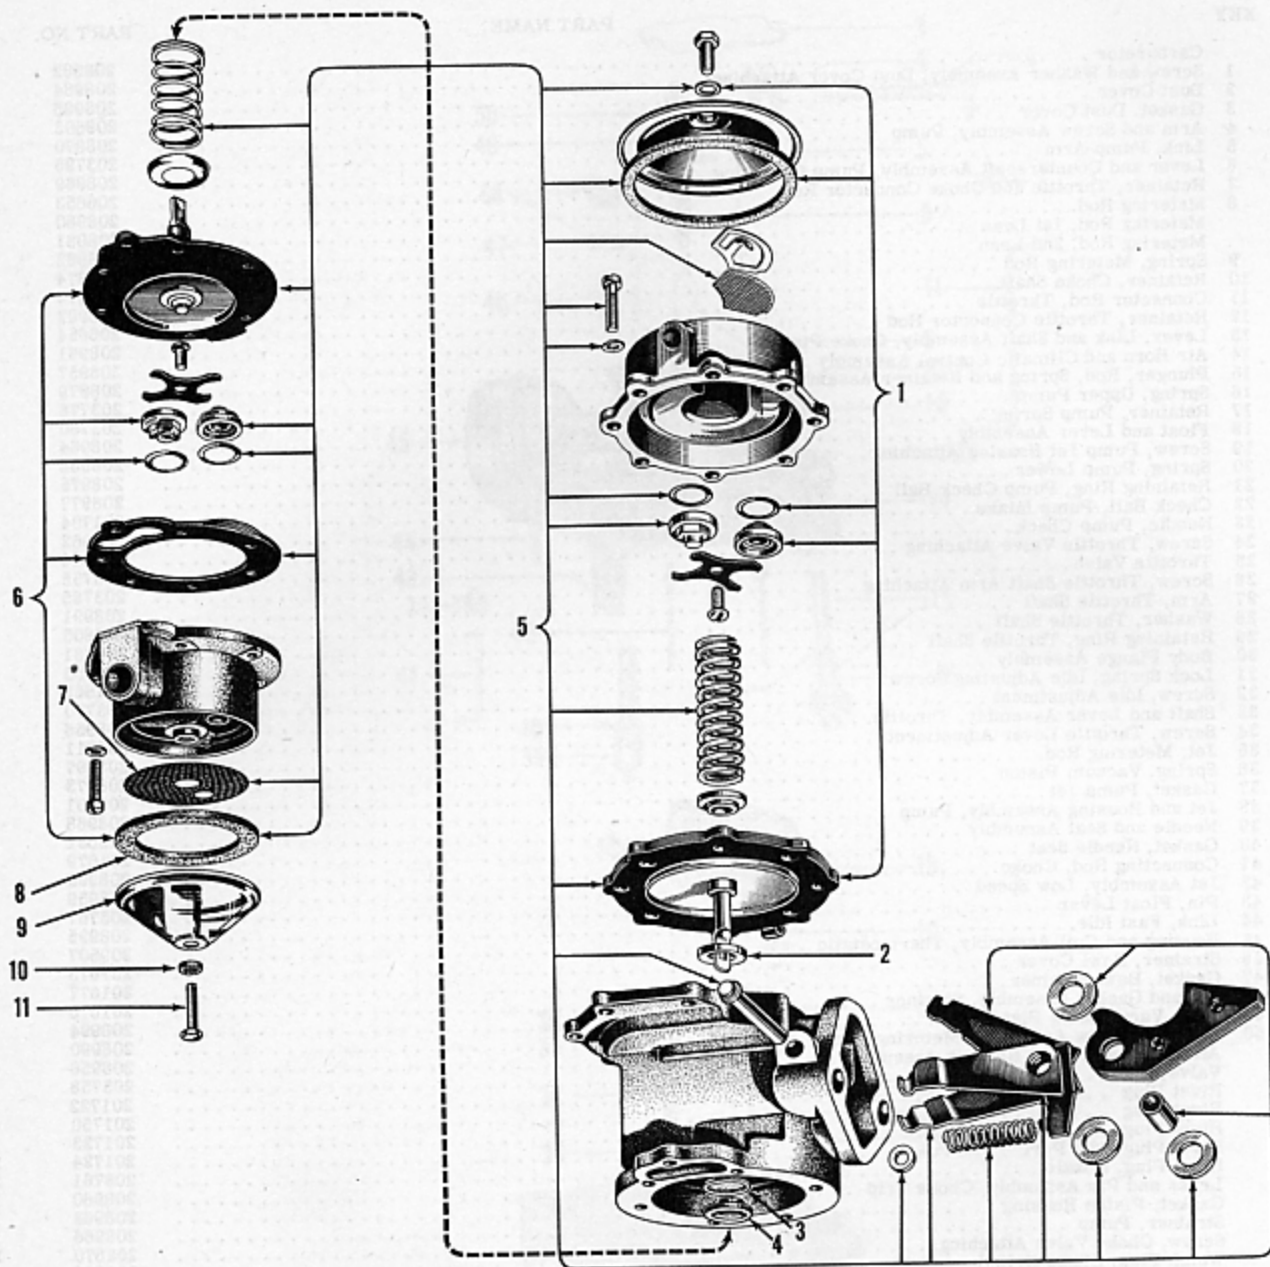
TYPICAL FUEL AND VACUUM PUMP - EXPLODED VIEW
